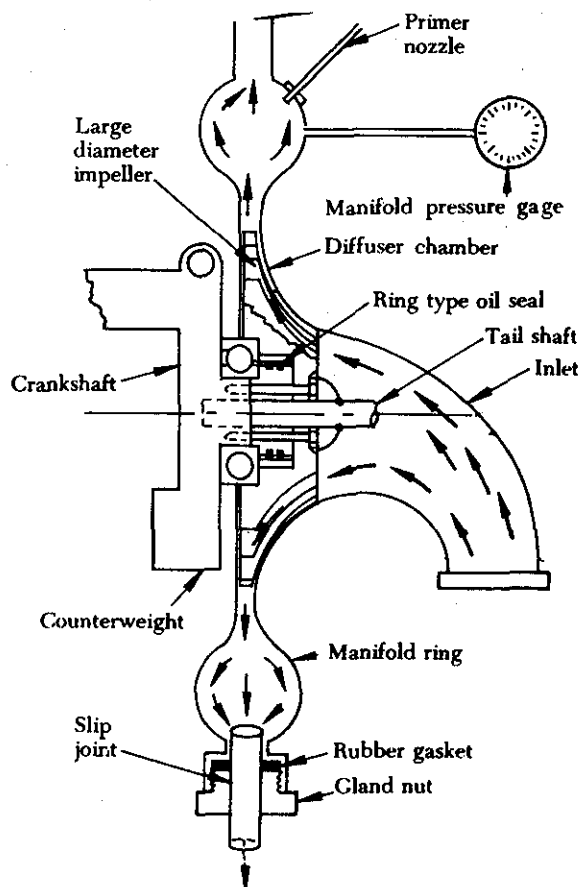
Distribution impeller arrangement used on a radial engine.
